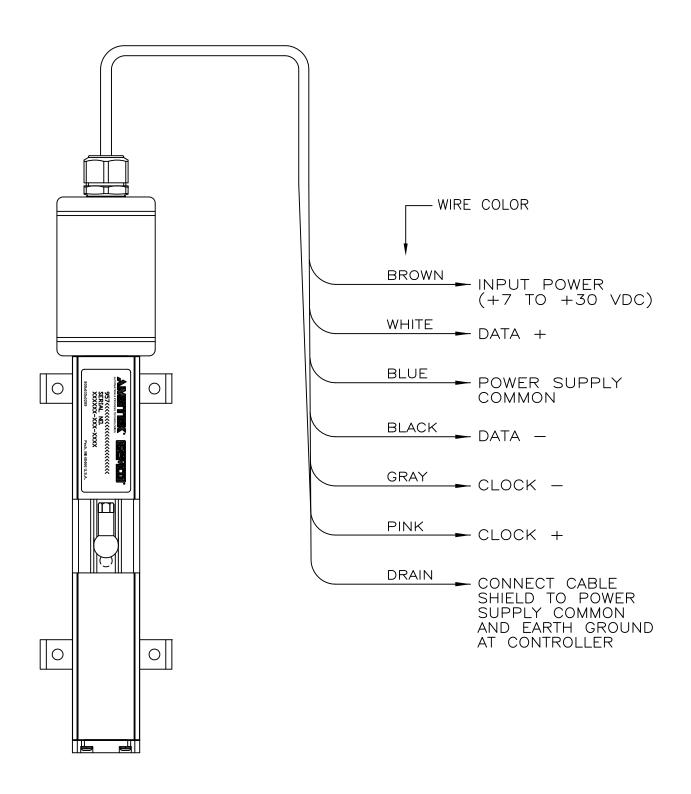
Wiring for Connector Option "C", Integral Cable Assembly
